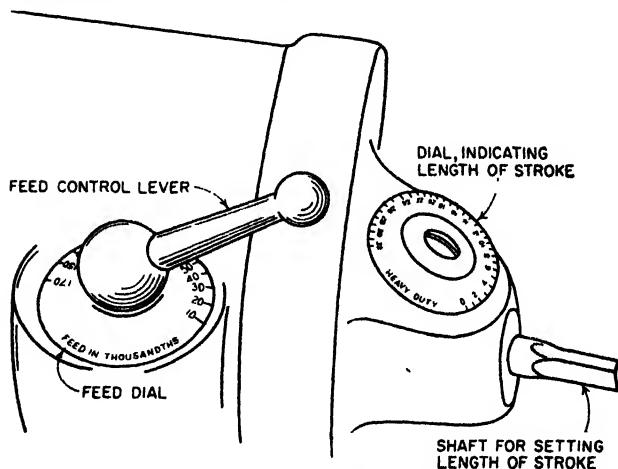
Cincinnati stroke-adjusting shaft and feed dial. (The Cincinnati Shaper Company)
